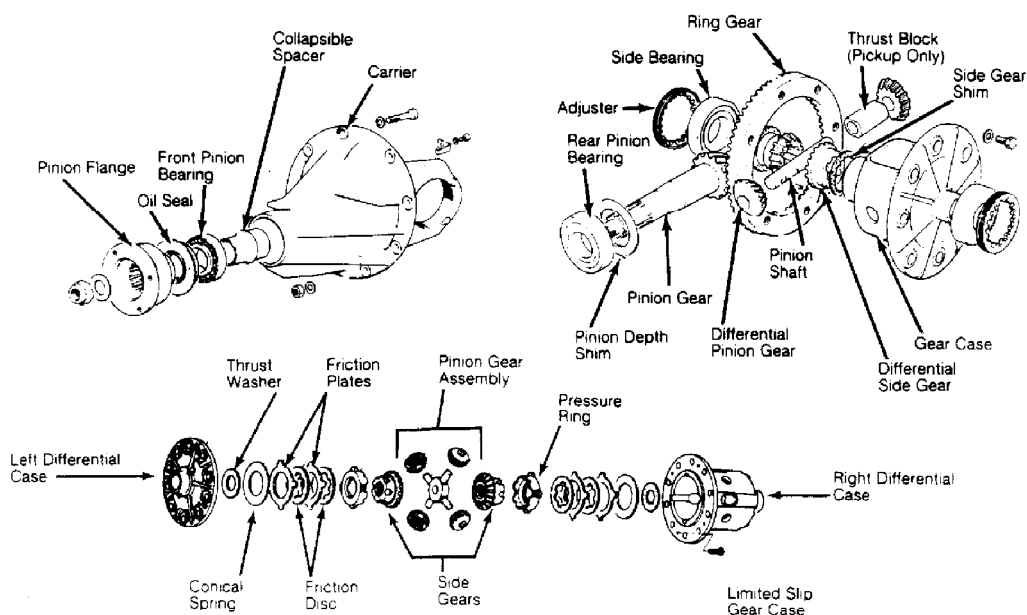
Exploded View of Mazda Rear Axle Assembly
